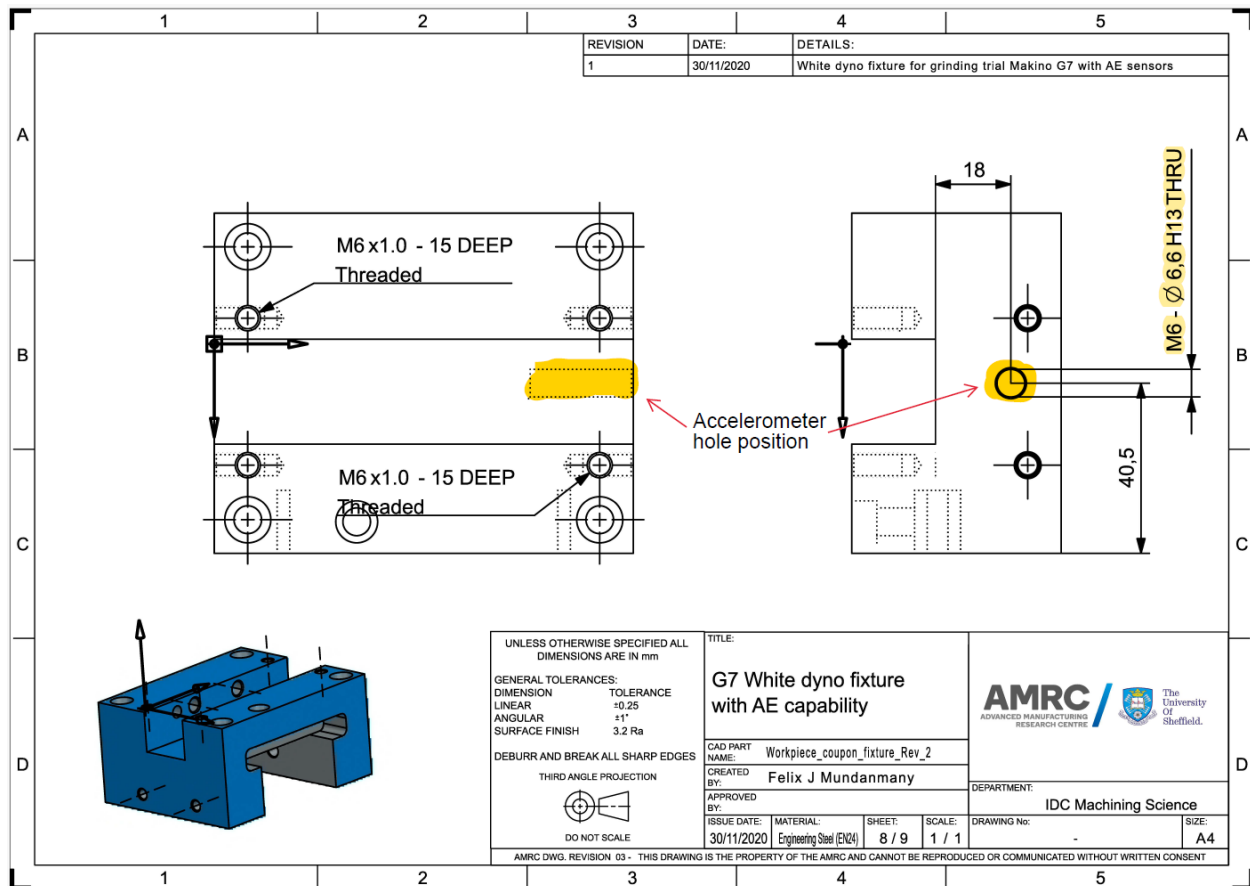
Drawing showing hole position for accelerometer clamping. M6 through hole was machined into the workpiece fixture allowing for a threaded bolt to fasten the accelerometer in position against the fixture stock.
